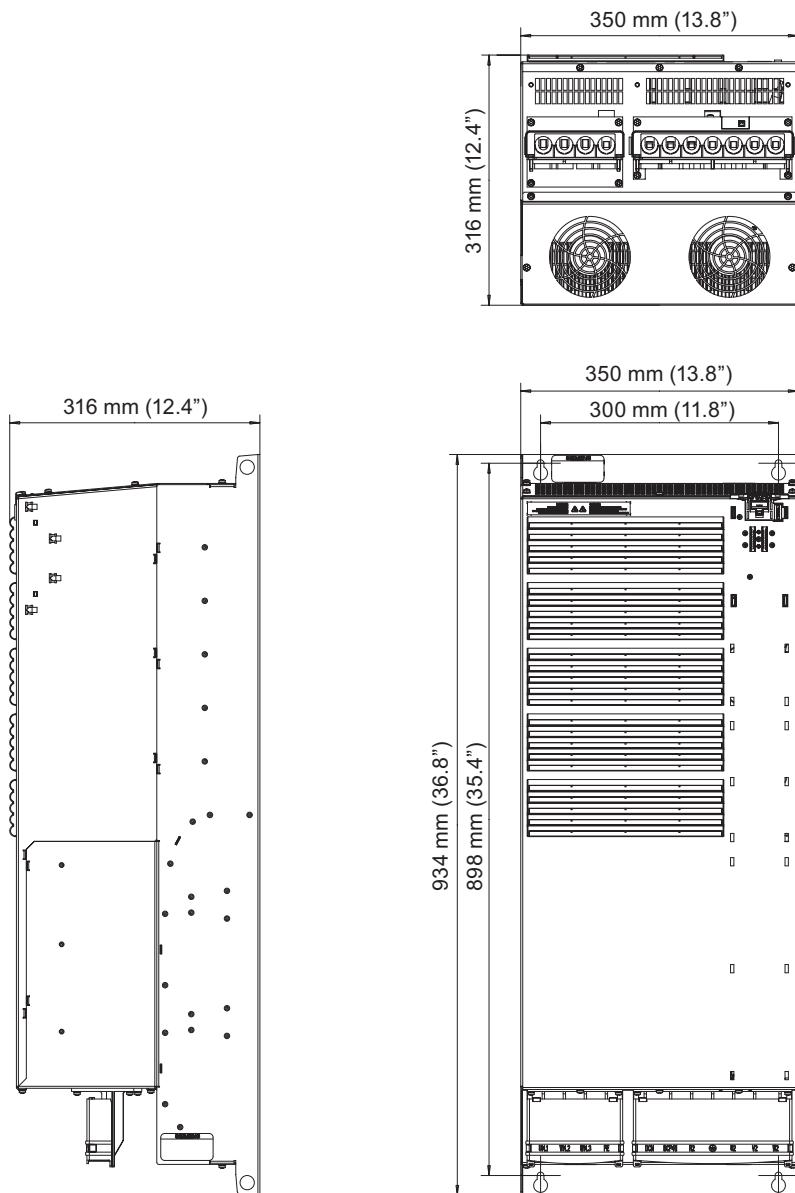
Dimensional drawing PM250 FSF, 400V (filtered)
